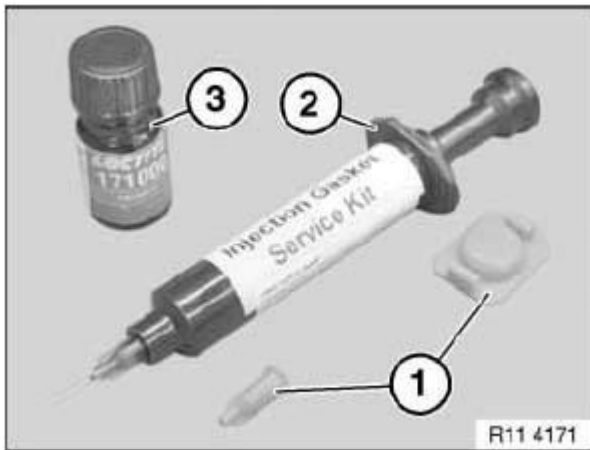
Identifying Screw Caps, Injector And Loctite Sealing Compound (128357)
